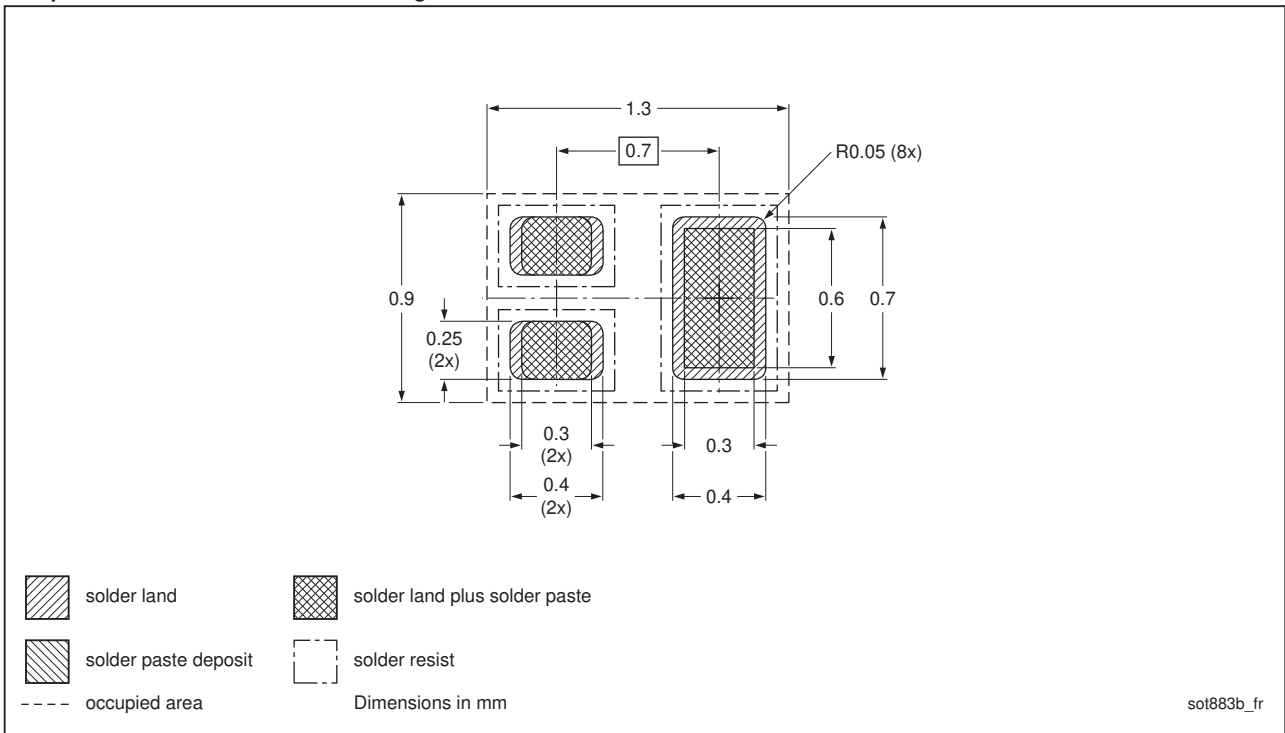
Reflow soldering footprint for SOT883B (DFN1006B-3)
